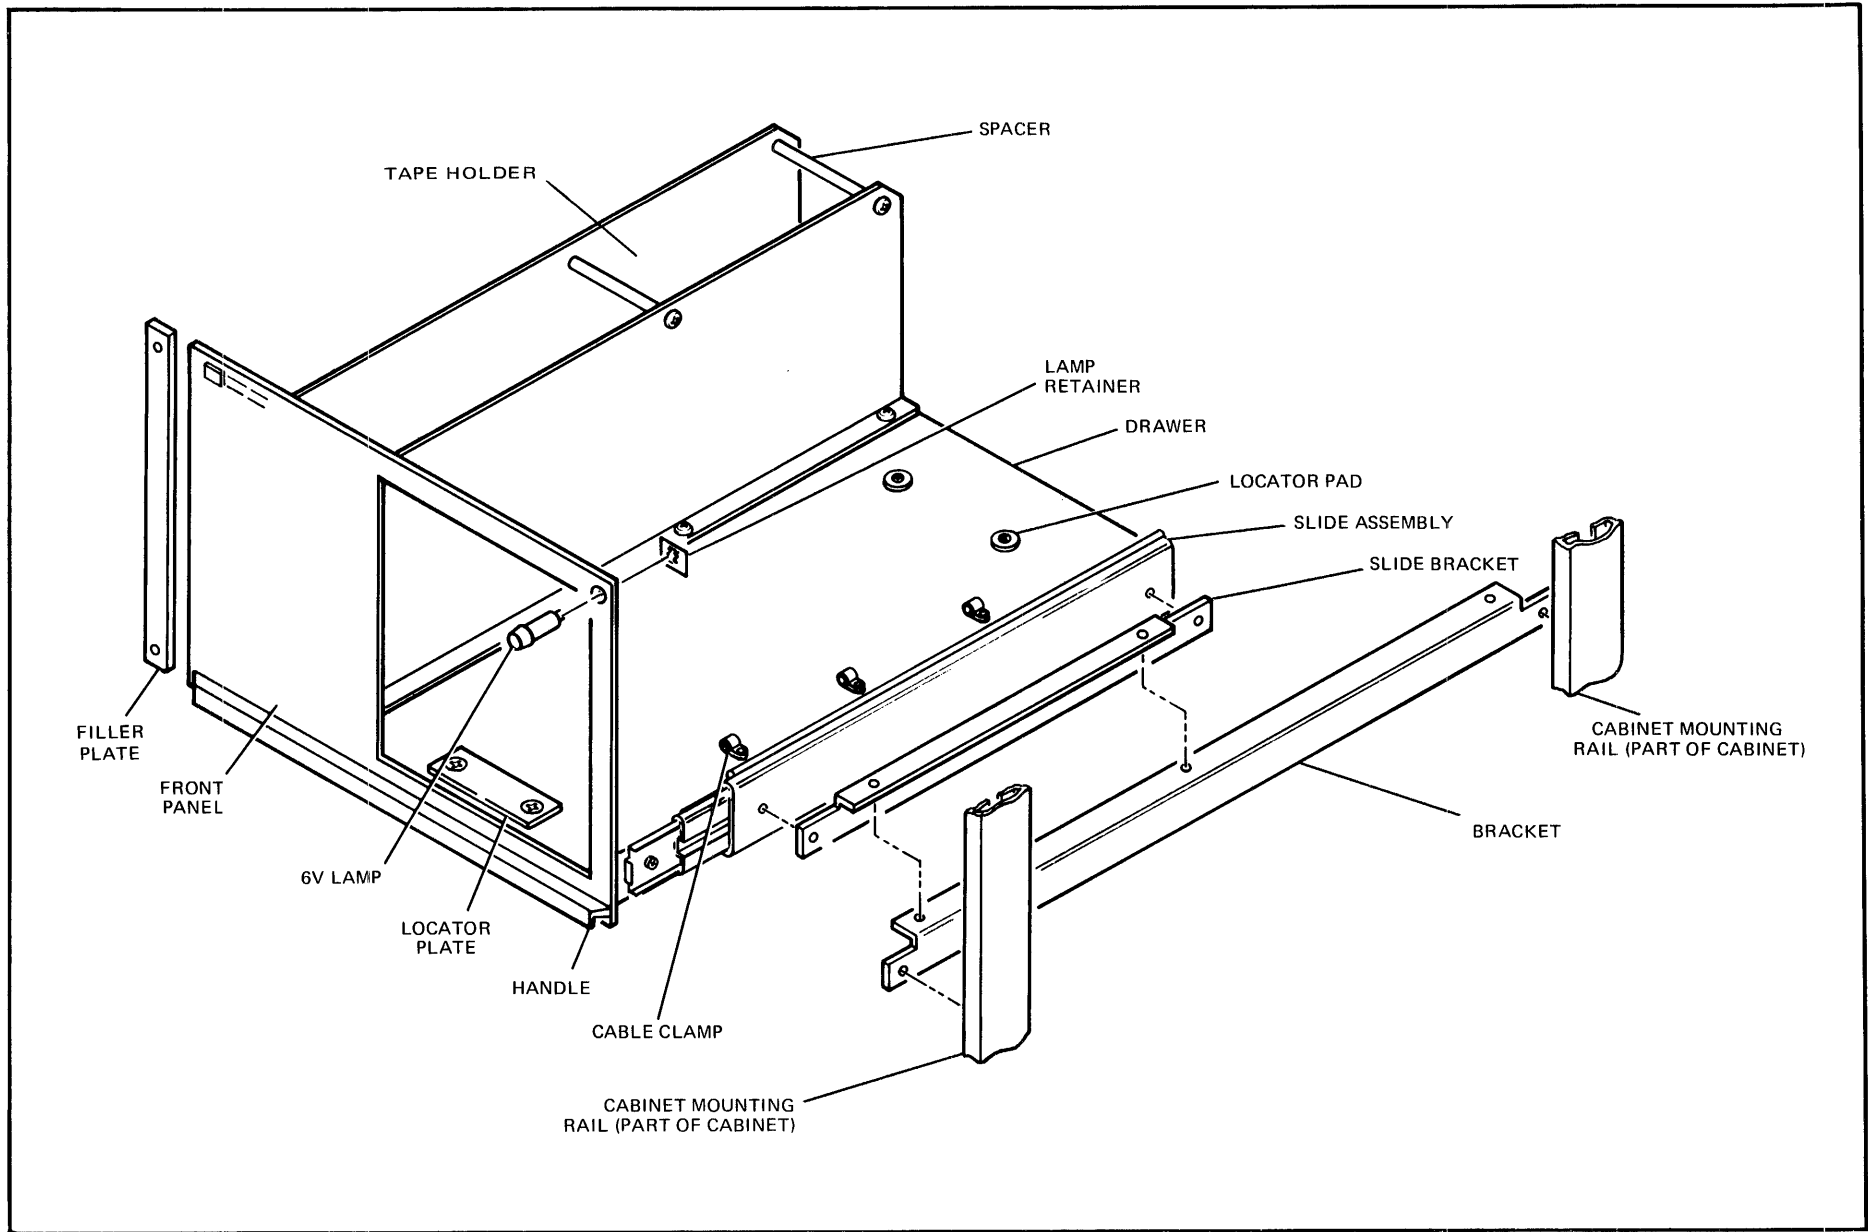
Assembling and Installing the HP 2895B Tape Punch Slide Mounting Drawer
